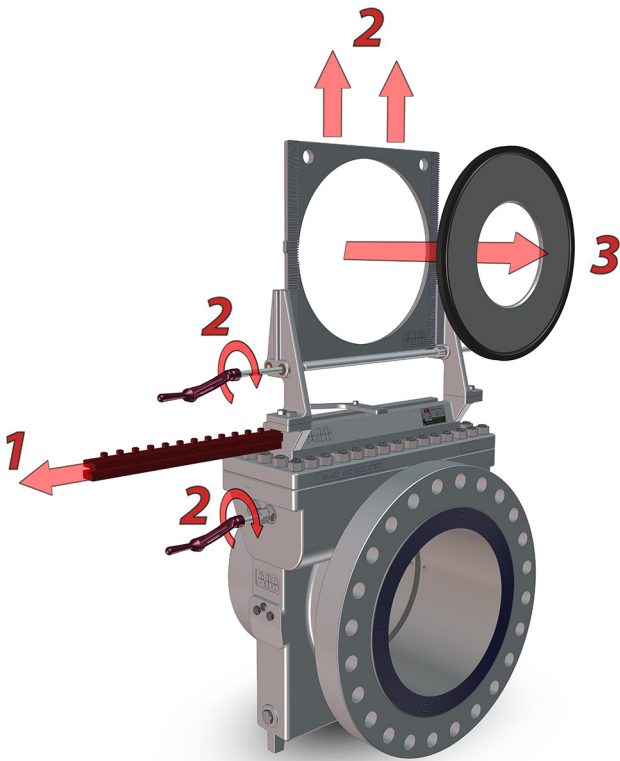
Orifice plate removal – 16 to 30 in. models
